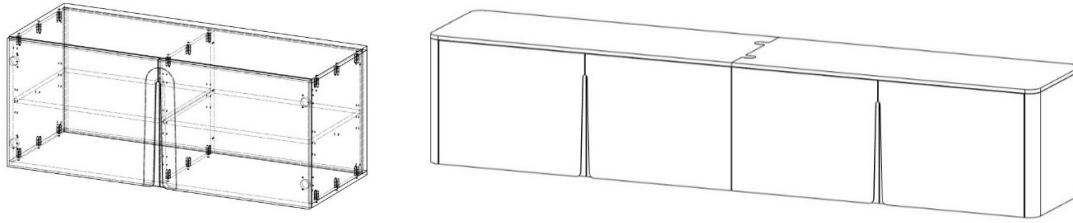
Wireframe view of basic cabinet, and complete view of upper assembly displayed in 2650 overall length.
